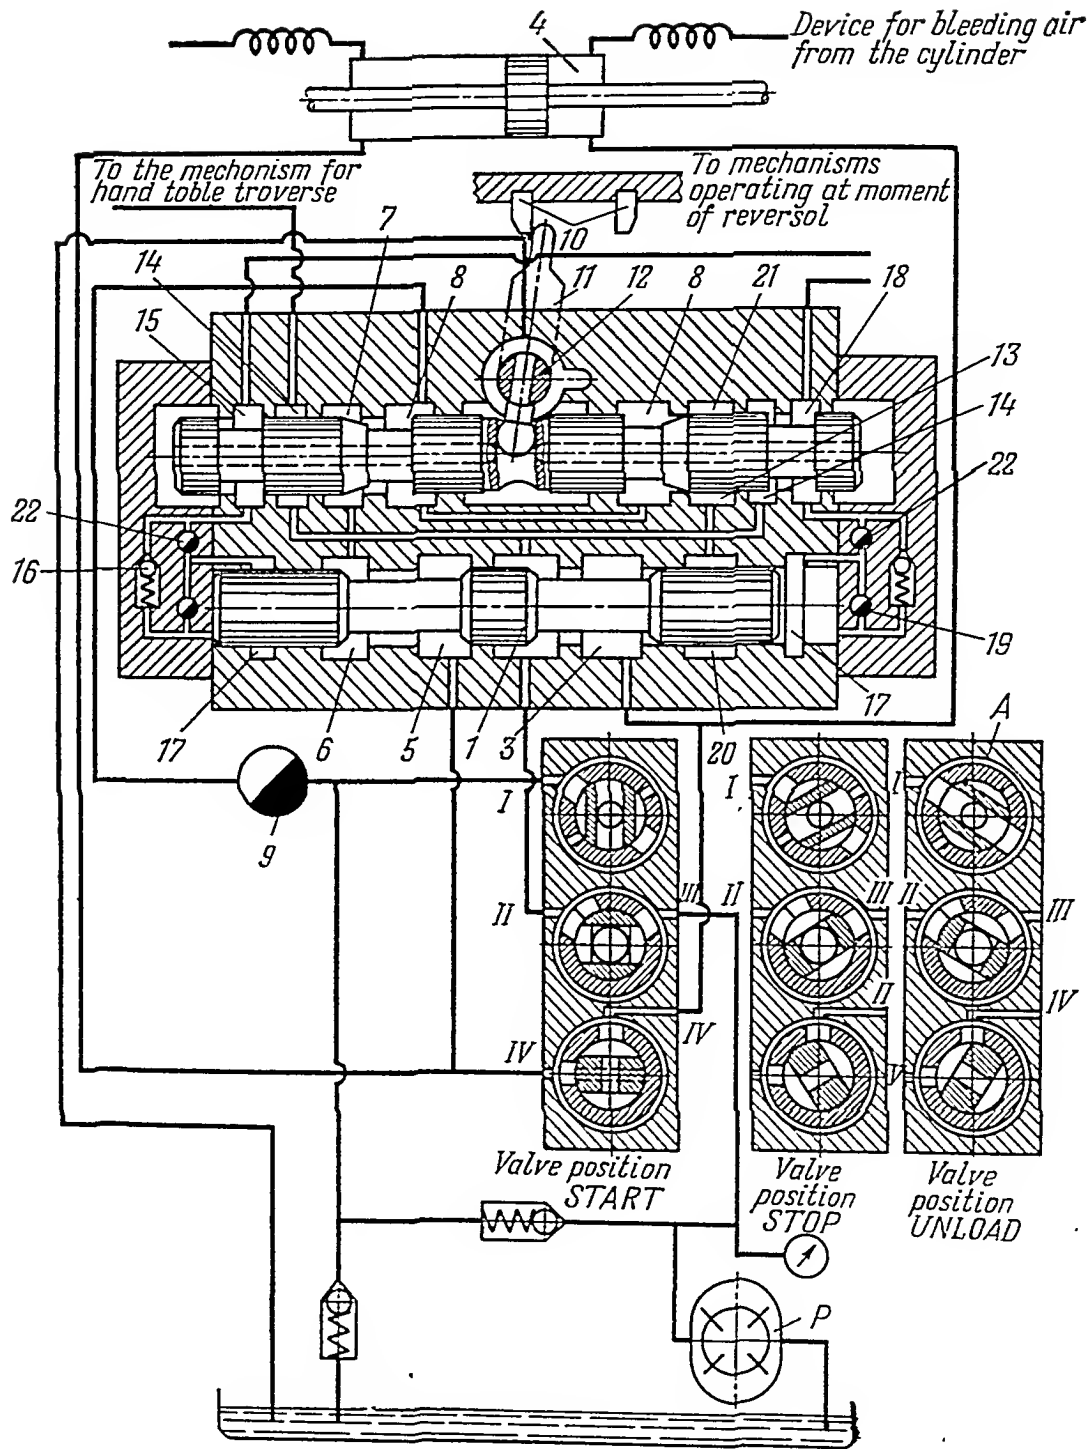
Diagram of the standard hydraulic control panel, model T31, for grinding machines
